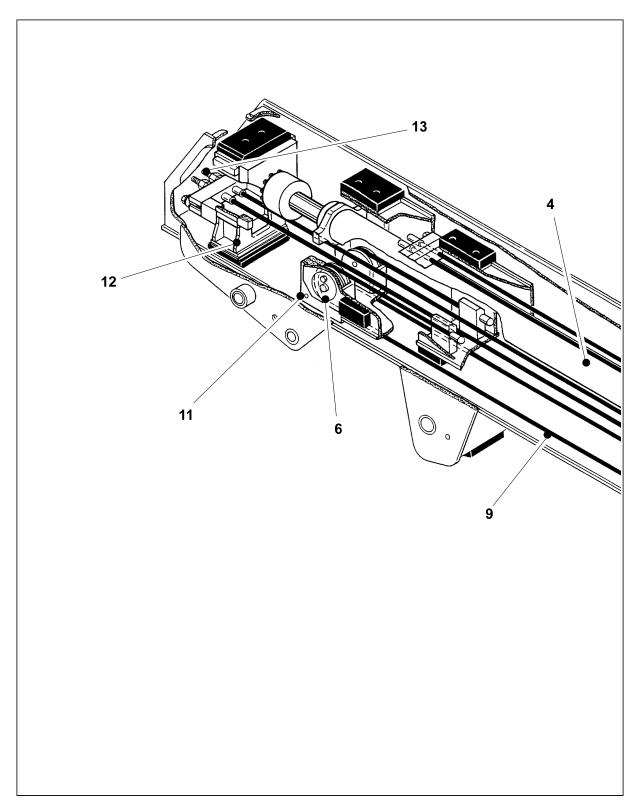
Boom Assembly Cutaway - S Models - Sheet 1 of 3
